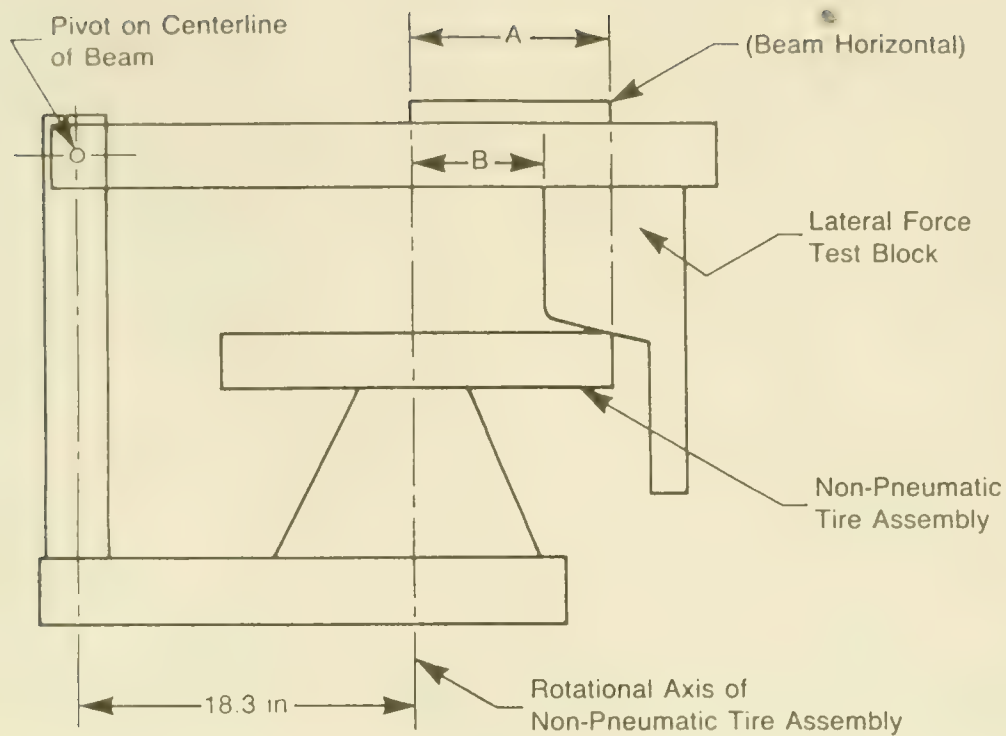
Lateral Force Test Fixture (Dimension in Inches)
